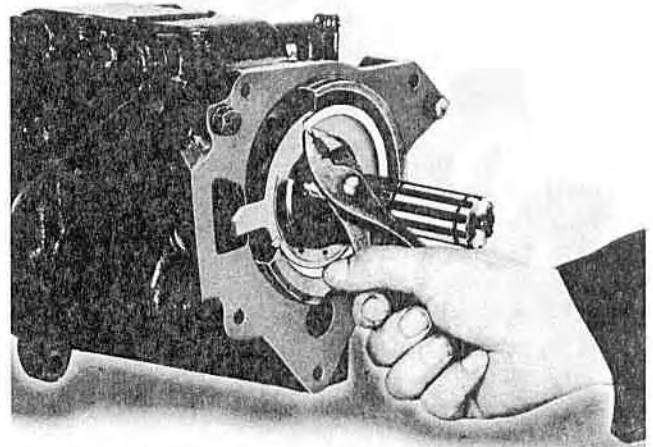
Removing the Stationary Gear Plate Retaining Snap Ring
